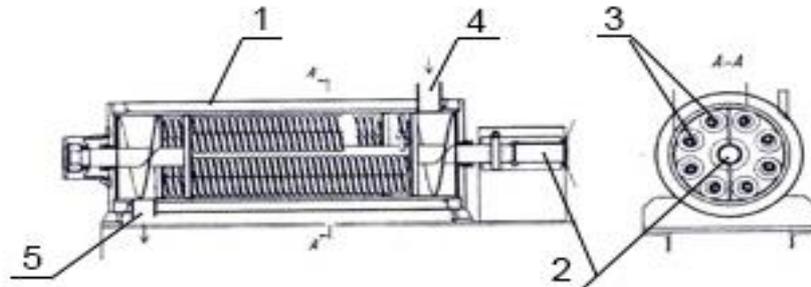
Continuous rotary mill Viyuga-3: 1) cylindrical case; 2) cylindrical finishing case (eight-element cylindrical spirals); 3) rod elements with vertical plates supporting eight cylindrical spirals (mounted in the case with bearings); 4) loading bay; 5) unloading bay for activated material.
